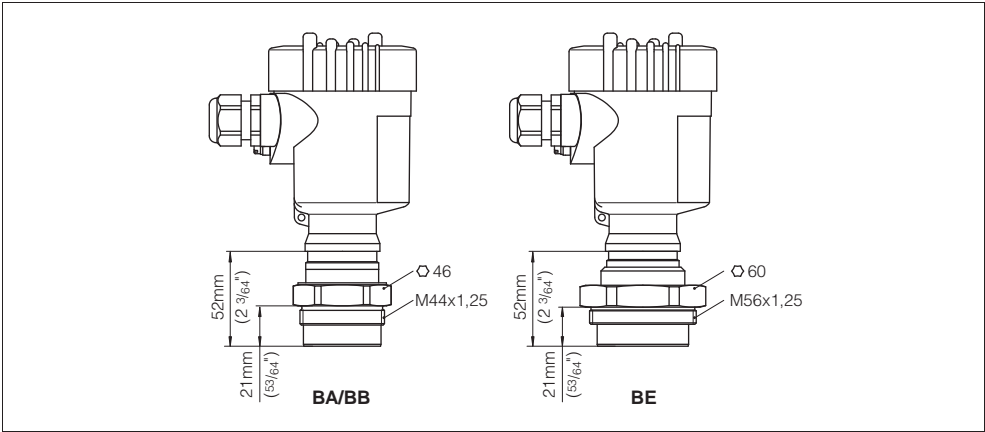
VEGABAR 64, threaded fitting for paper industry: BA/BB = M44x1.25, BE = M 56x1.25
